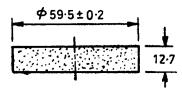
B RUBBER GASKET FOR 60 mm SIZE
